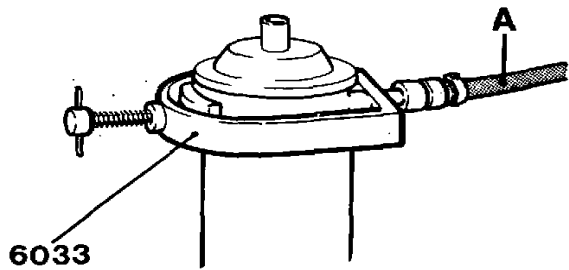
Pressure testing the oil cooler, TD60, TID60
